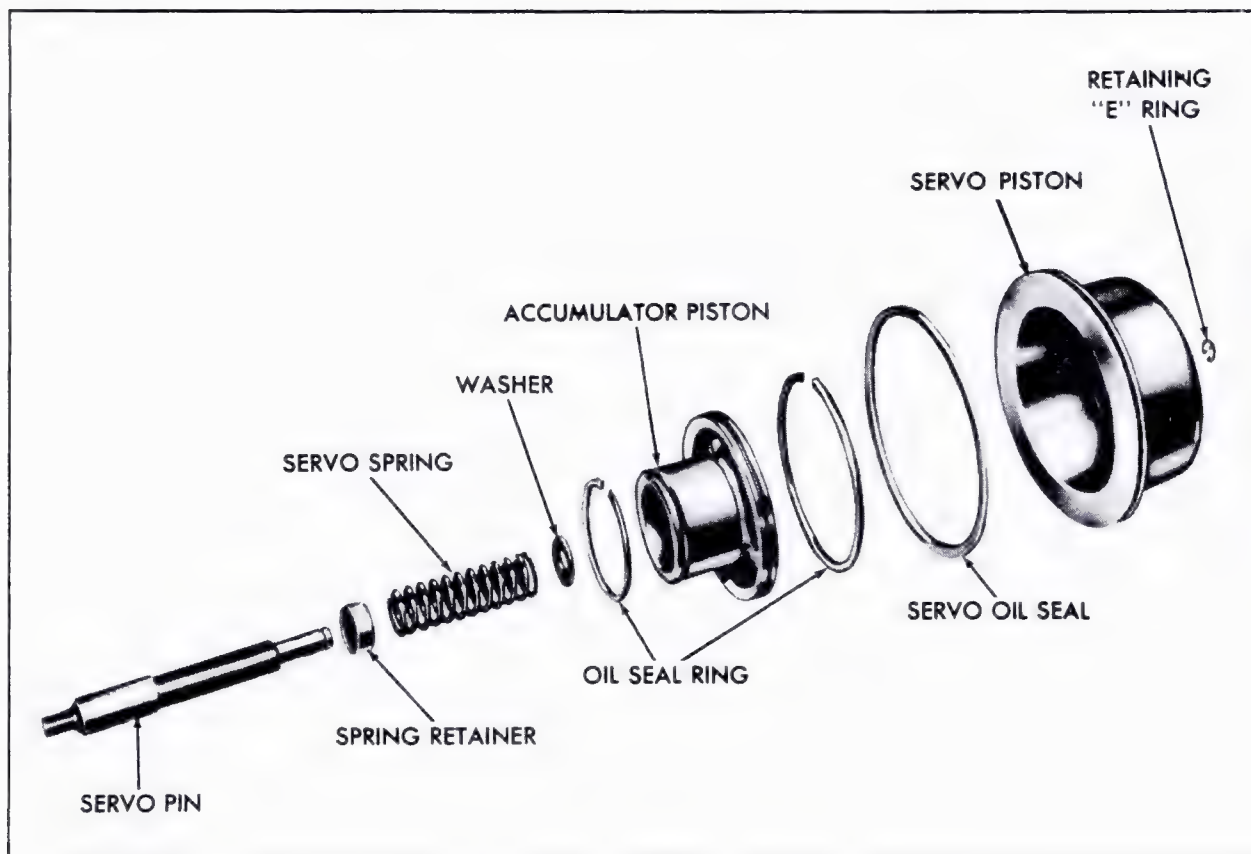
Rear Servo and Accumulator Assembly Disassembled
